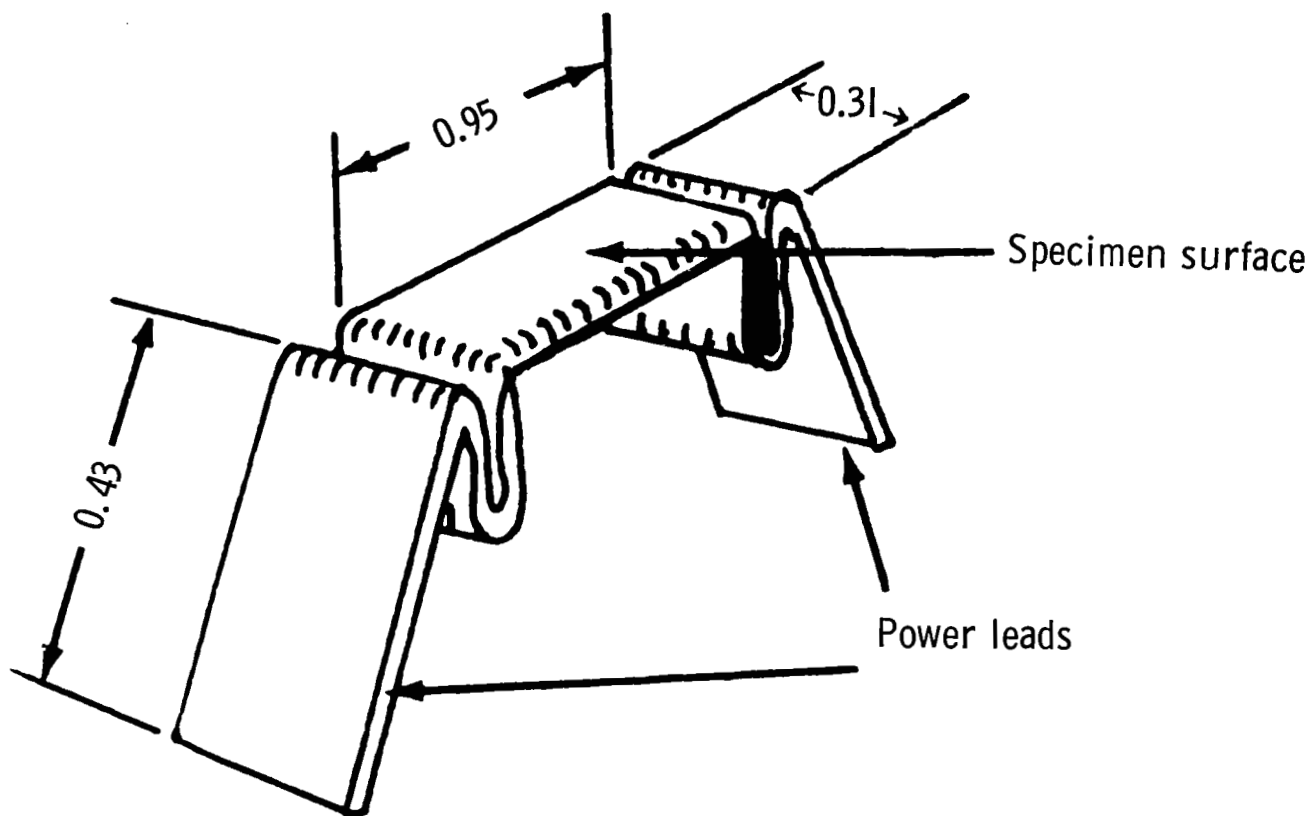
Heater design for high-temperature X-ray diffractometer attachment. (Dimensions are in centimeters.)
